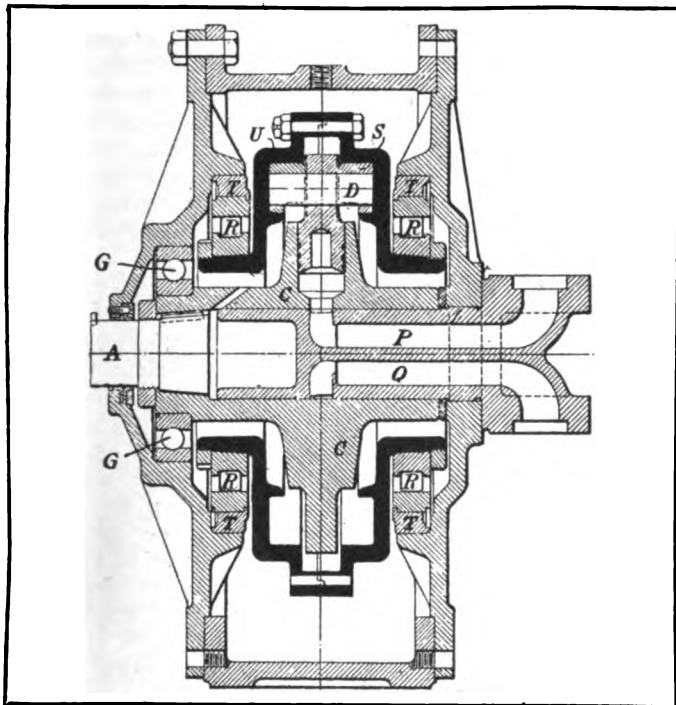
Axial cross-section of a Hele-Shaw rotary pump as applied to the driving of motor trucks
